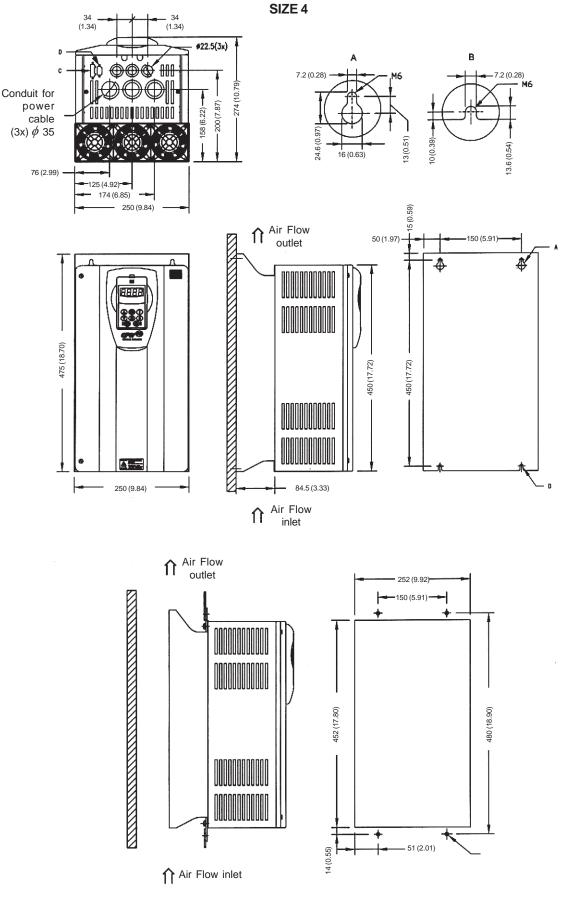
Size 4 - Dimensions in mm (inch)
